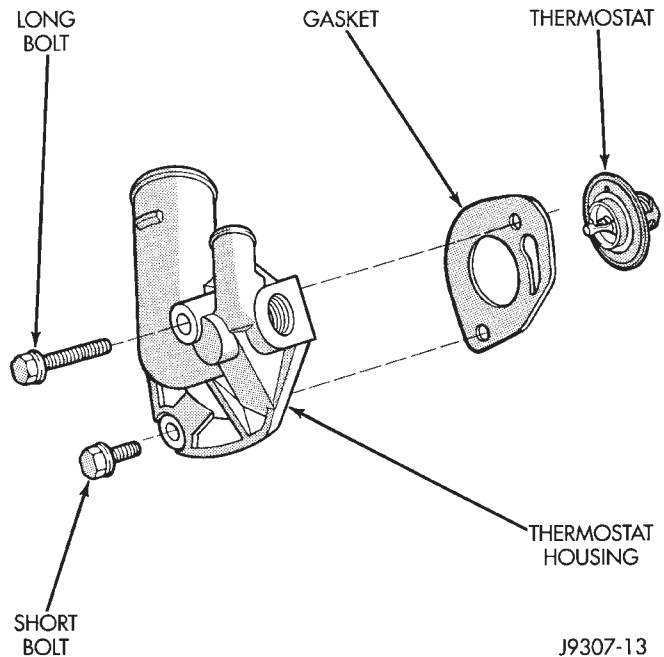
Thermostat Removal/Installation—4.0L Engine
